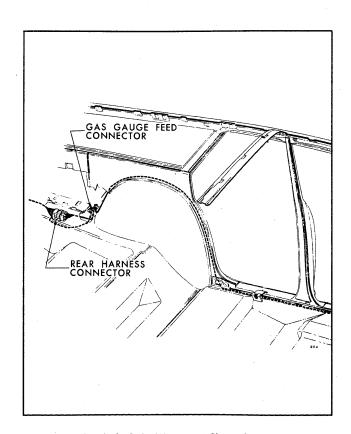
Left Side Wiring - Chevrolet "X" Bodies
